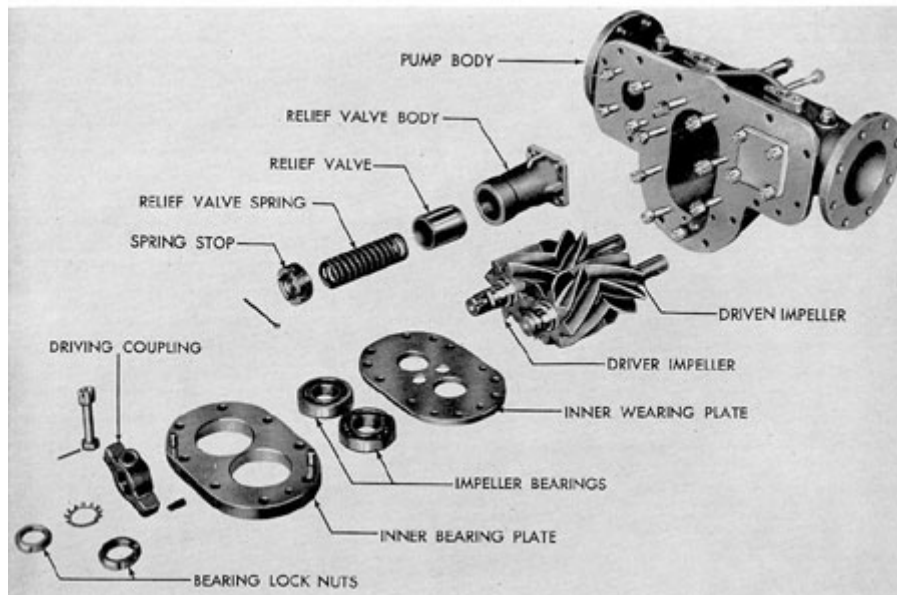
Drive end of attached lubricating oil pump, F-M.
